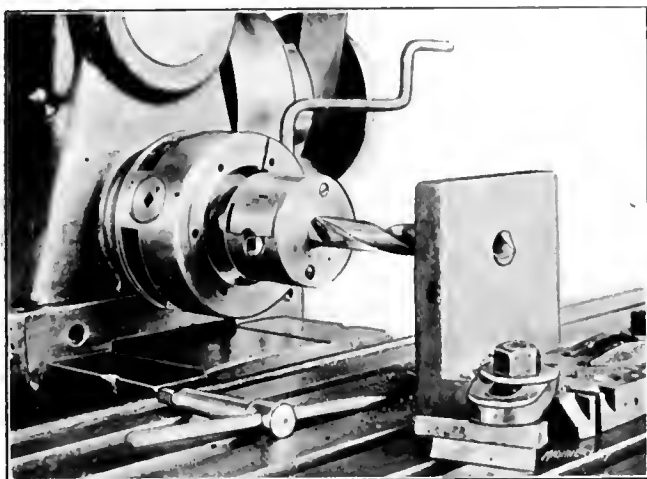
Casler Eccentric Boring Head, Centered for Drilling.
